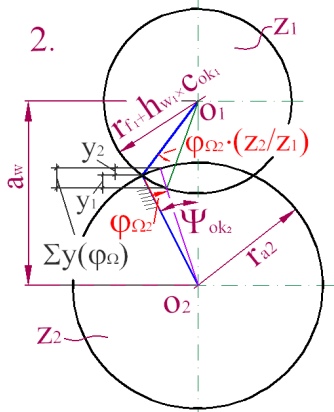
Geometric model for calculation the oil expel for external gearing
